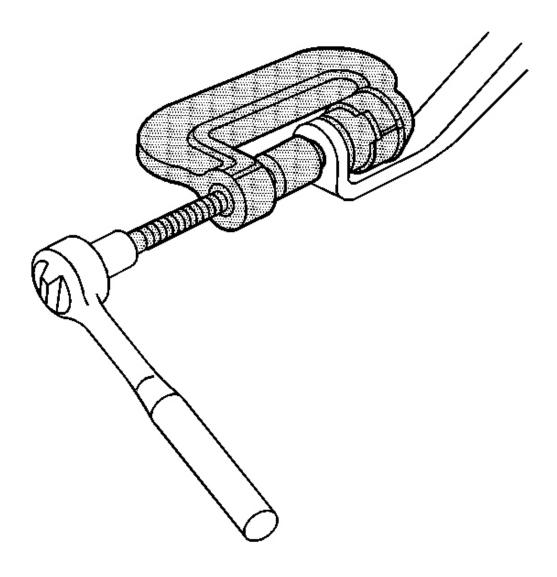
Removing Upper Ball Joint From Steering Knuckle Courtesy of GENERAL MOTORS CORP.
